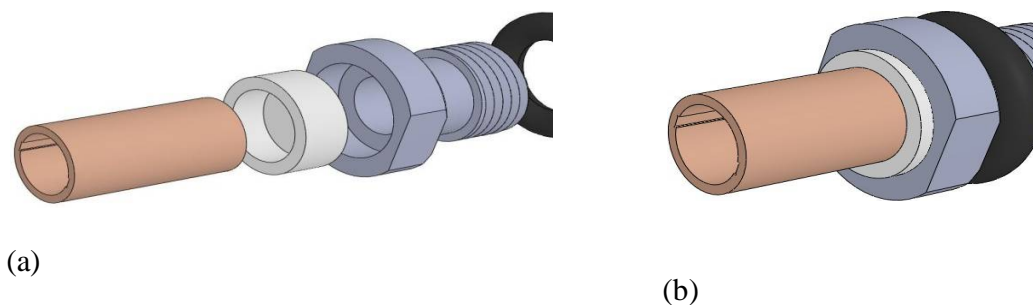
(a) Exploded and (b) assembly view of pressure port
